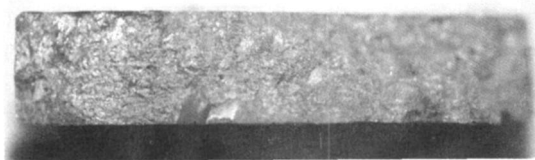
Fatigue fracture pattern of 3<sup>#</sup> specimen
